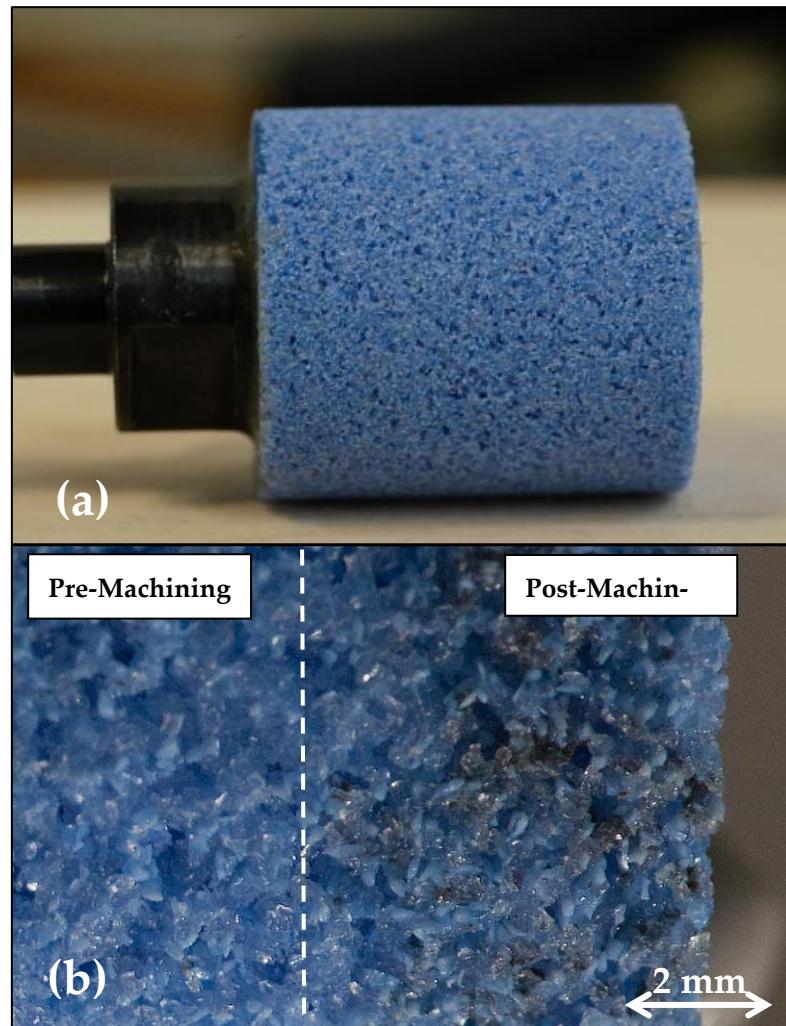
Example (a) macroscale image and (b) closeup of an alumina grinding wheel, pre- and post-machining.
